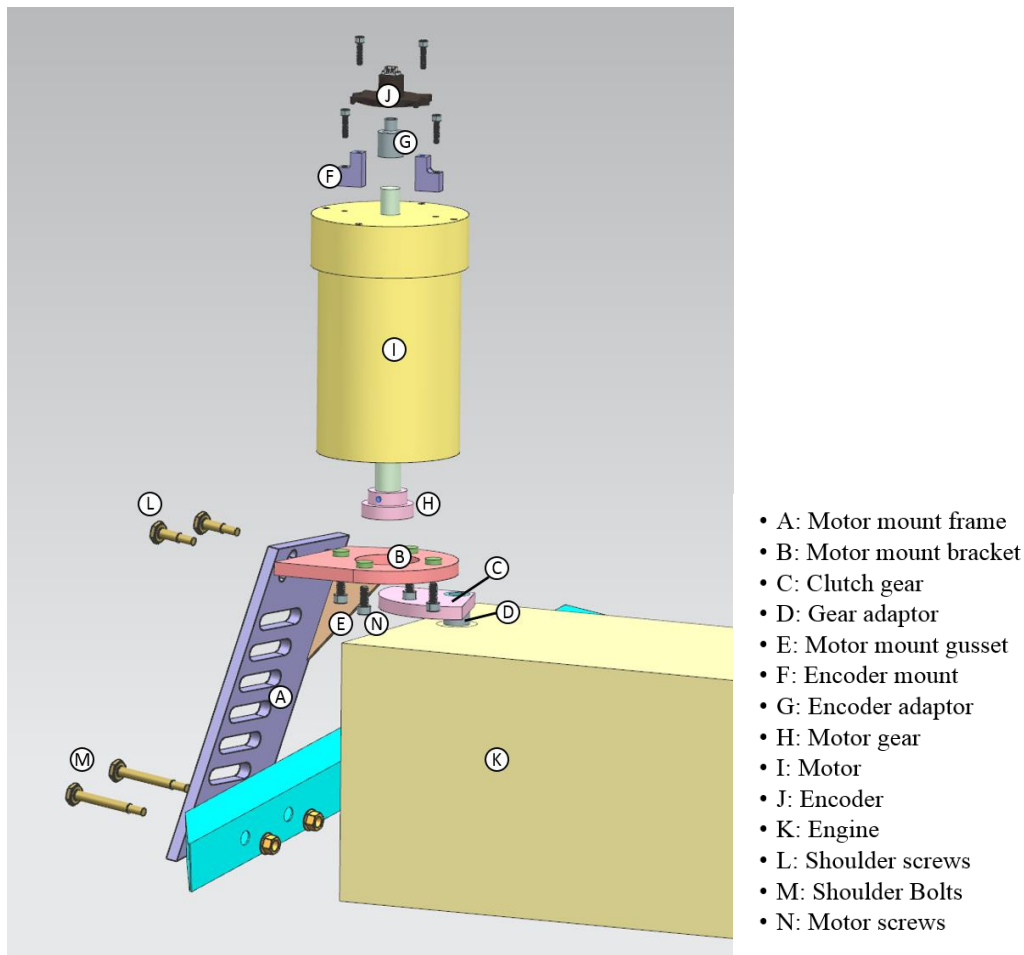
The CAD model of the motor mount system with all parts labelled. All the part names can be referred to this figure.
